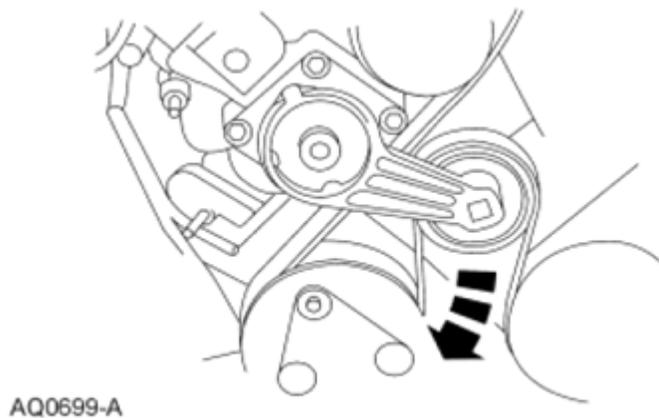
Rotating Tensioner Clockwise To Drive Belt
